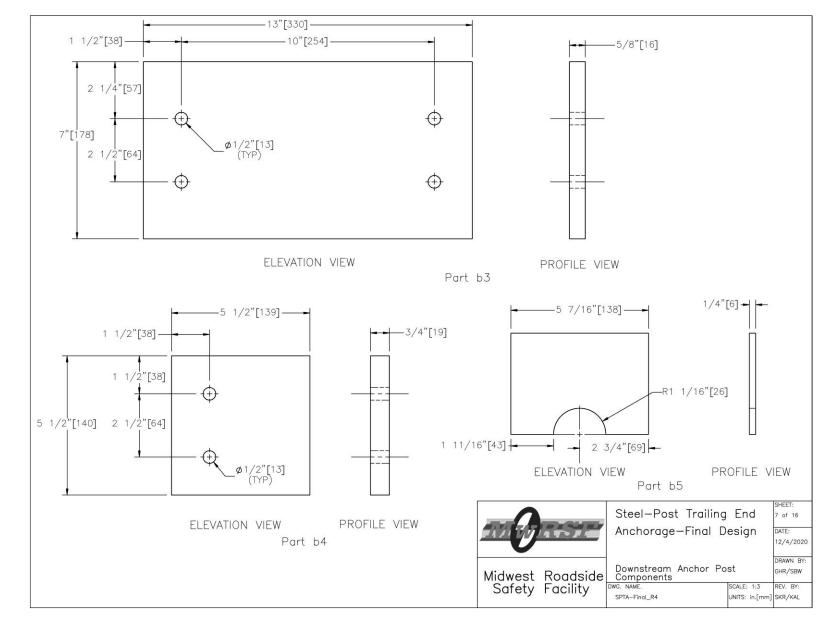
Steel-Post Trailing End Anchorage, Downstream Anchor Post Components
